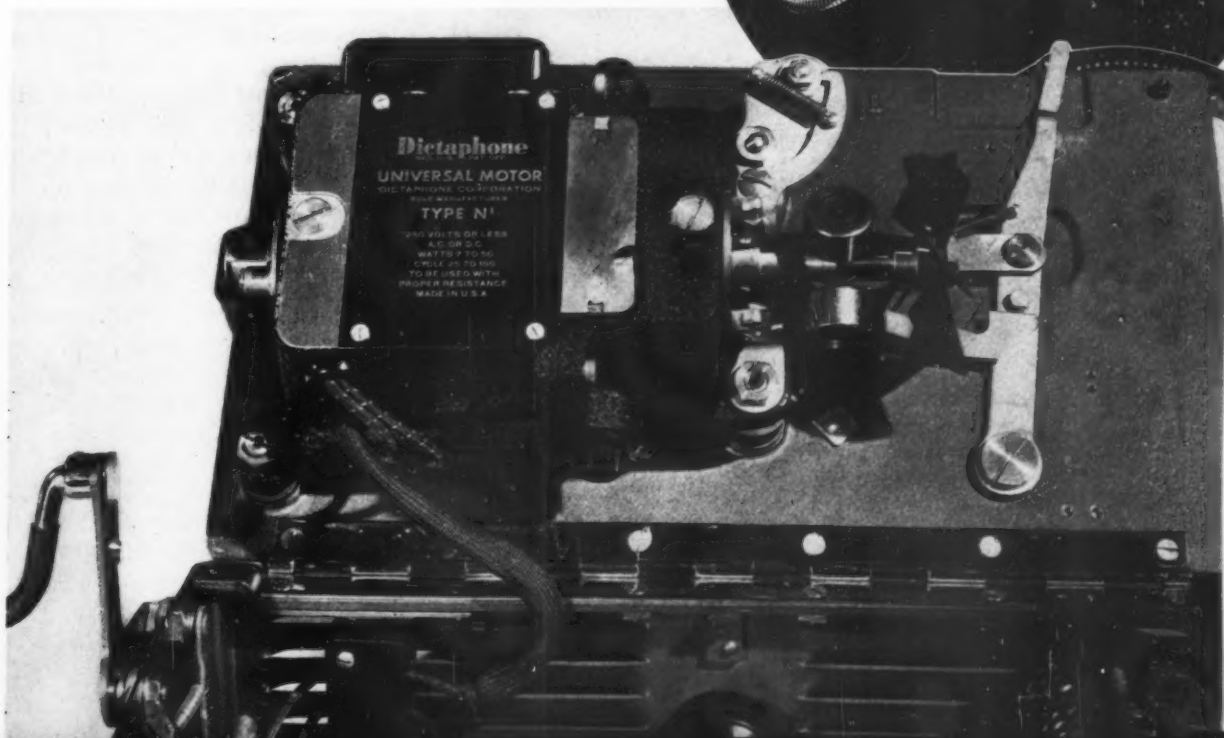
Cast aluminum frame holds driving motor, electrical parts, as well as some controls
